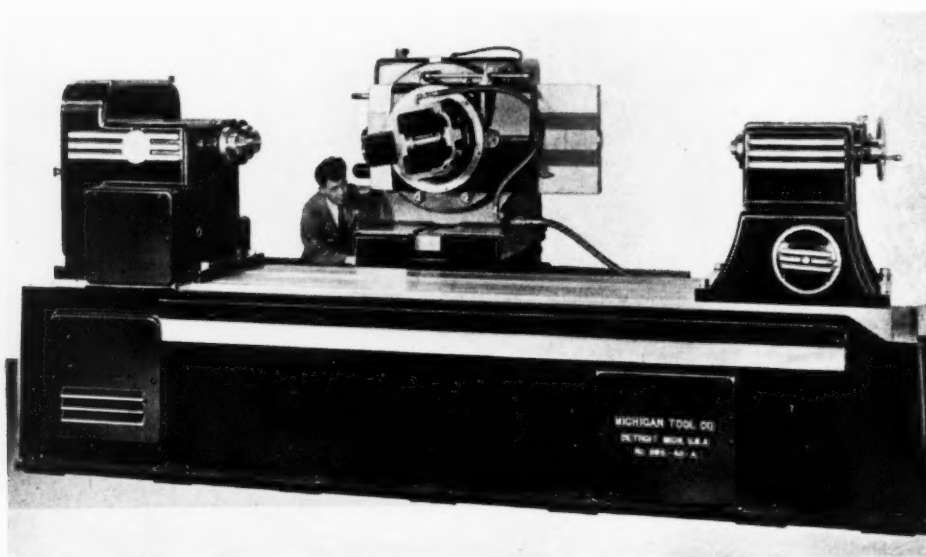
Gear-finishing Machine of Crossed-axis Shaving Type Brought out by the Michigan Tool Co. to Handle Gears up to 4 Feet in Diameter
